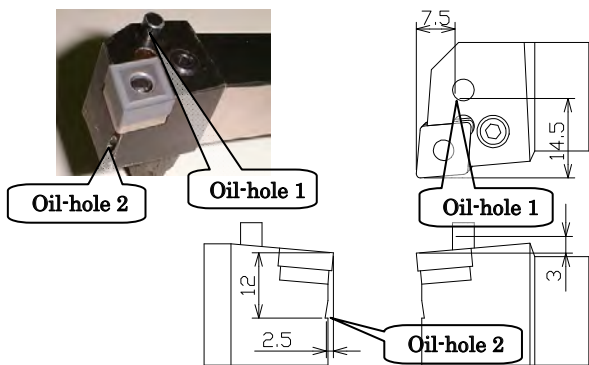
Overview of cutting tool with ϕ 1mm oil holes placed on the rake face and the flank sides
